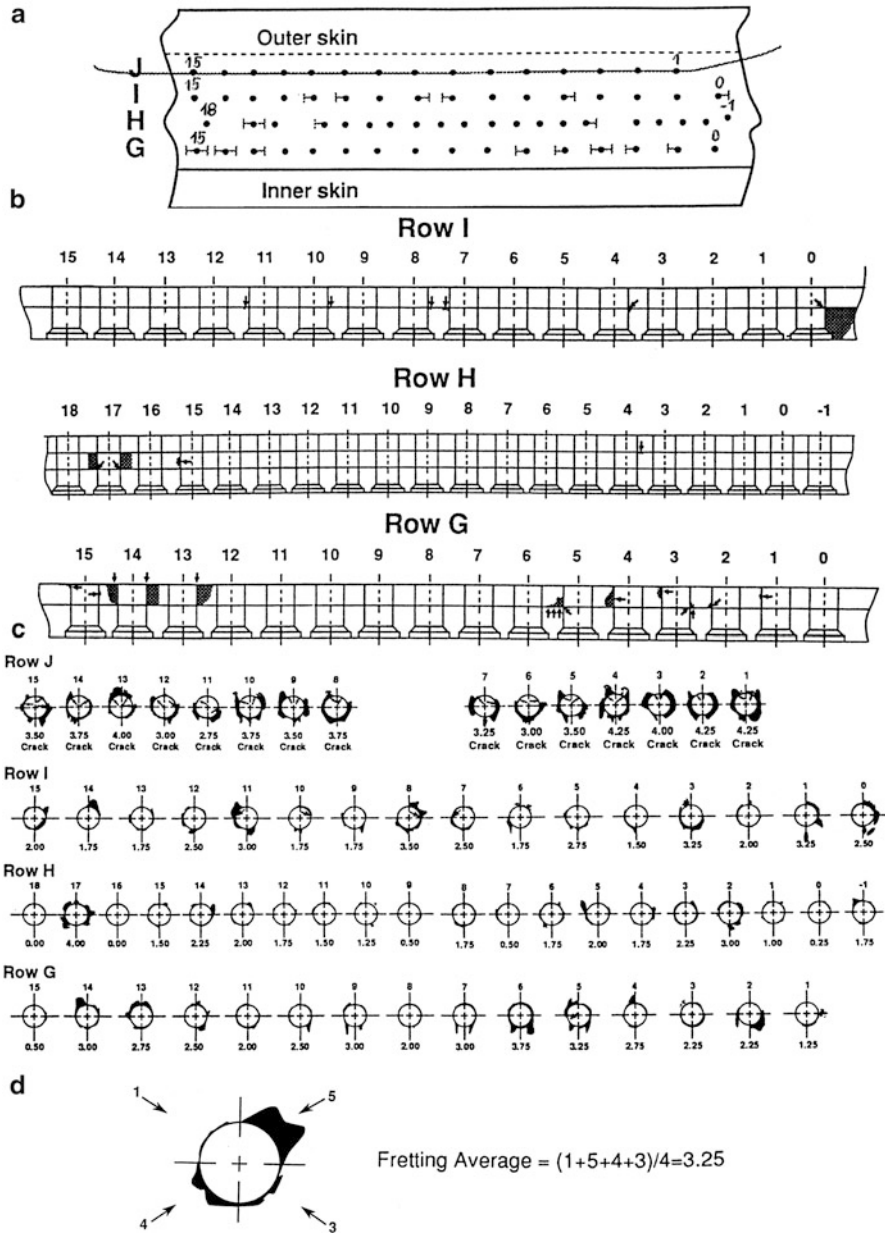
Characterization of fretting in a fuselage riveted lap joint: (a) scheme of the joint; (b) location of fatigue cracks (arrows show the initiation sites); (c) interior surface of the lap splice outer skin (shown are locations of fretting and fretting average values); (d) estimation of the fretting average value (Piascik et al. 1994)
